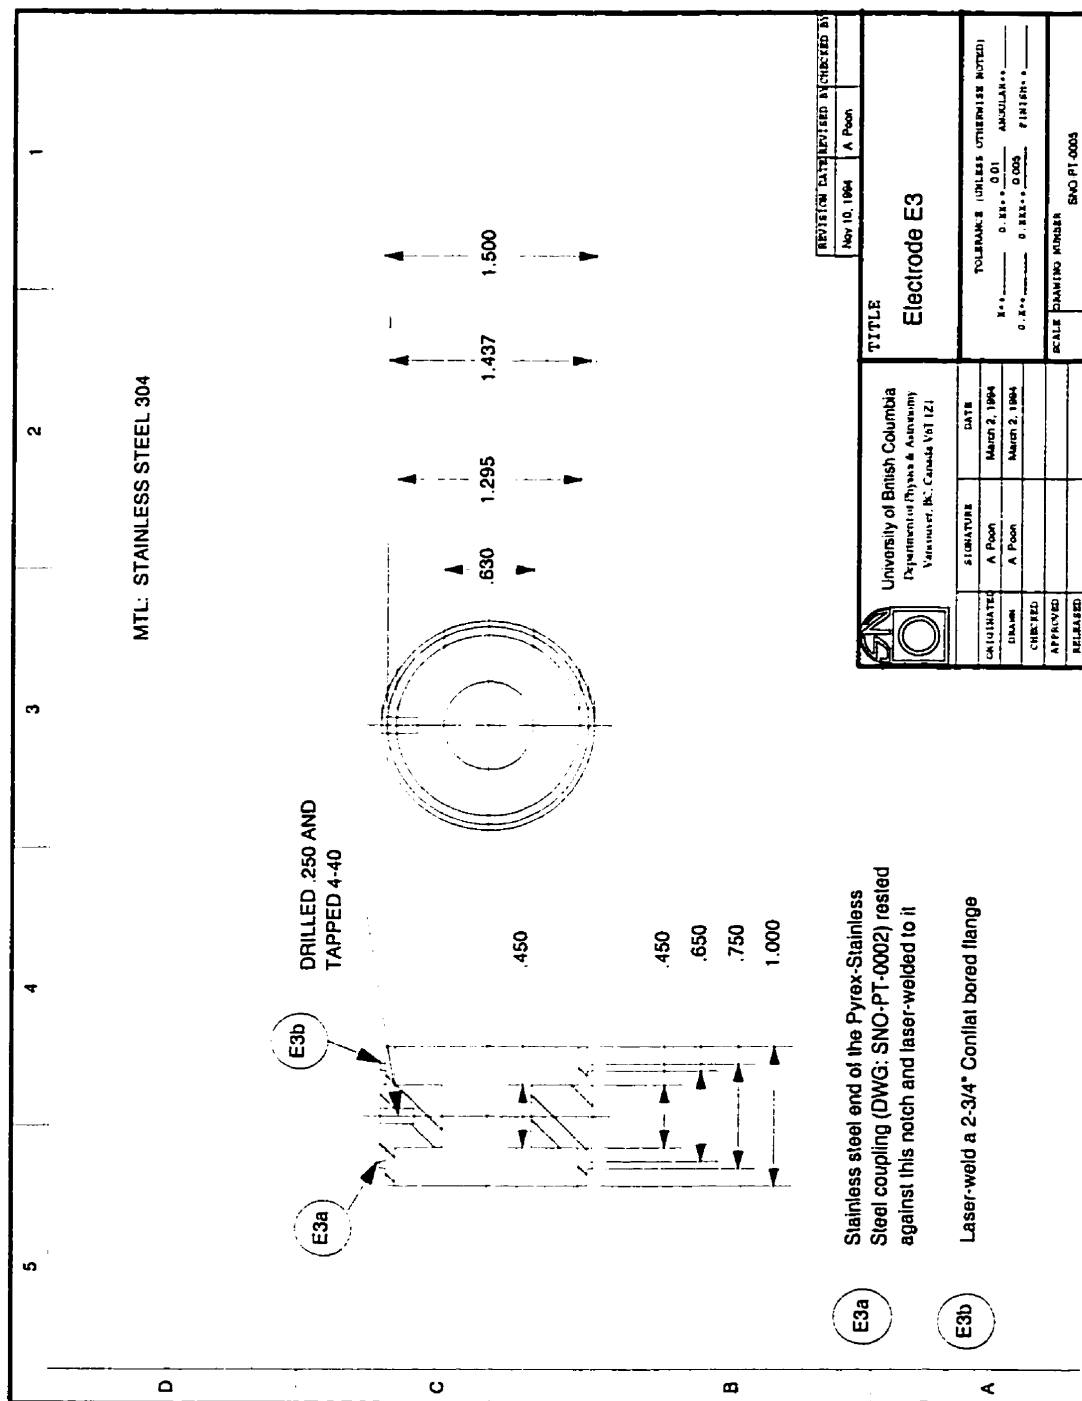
Technical drawing of the electrode E3 in the gas discharge line. (SNO-PT-0005).
